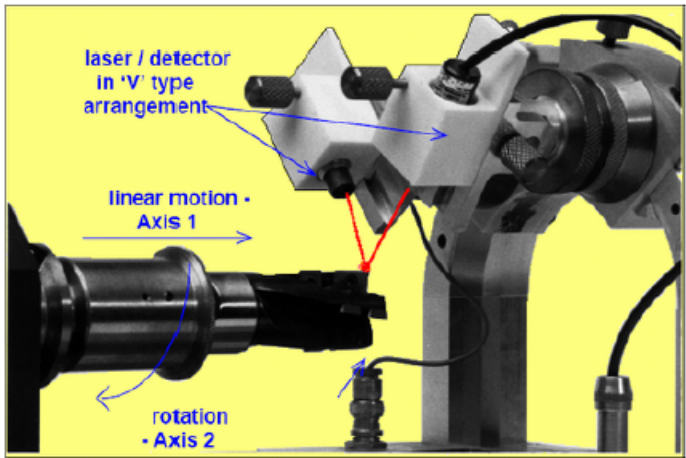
Prototype Device for Inspection of Milling Cutters
